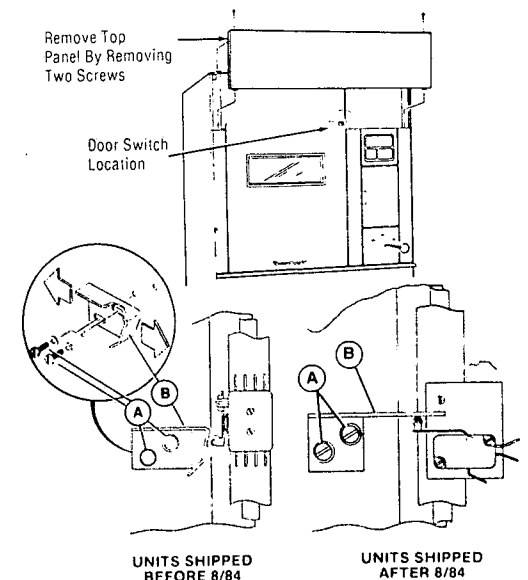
SLIDING DOOR SWITCH ADJUSTMENT.
